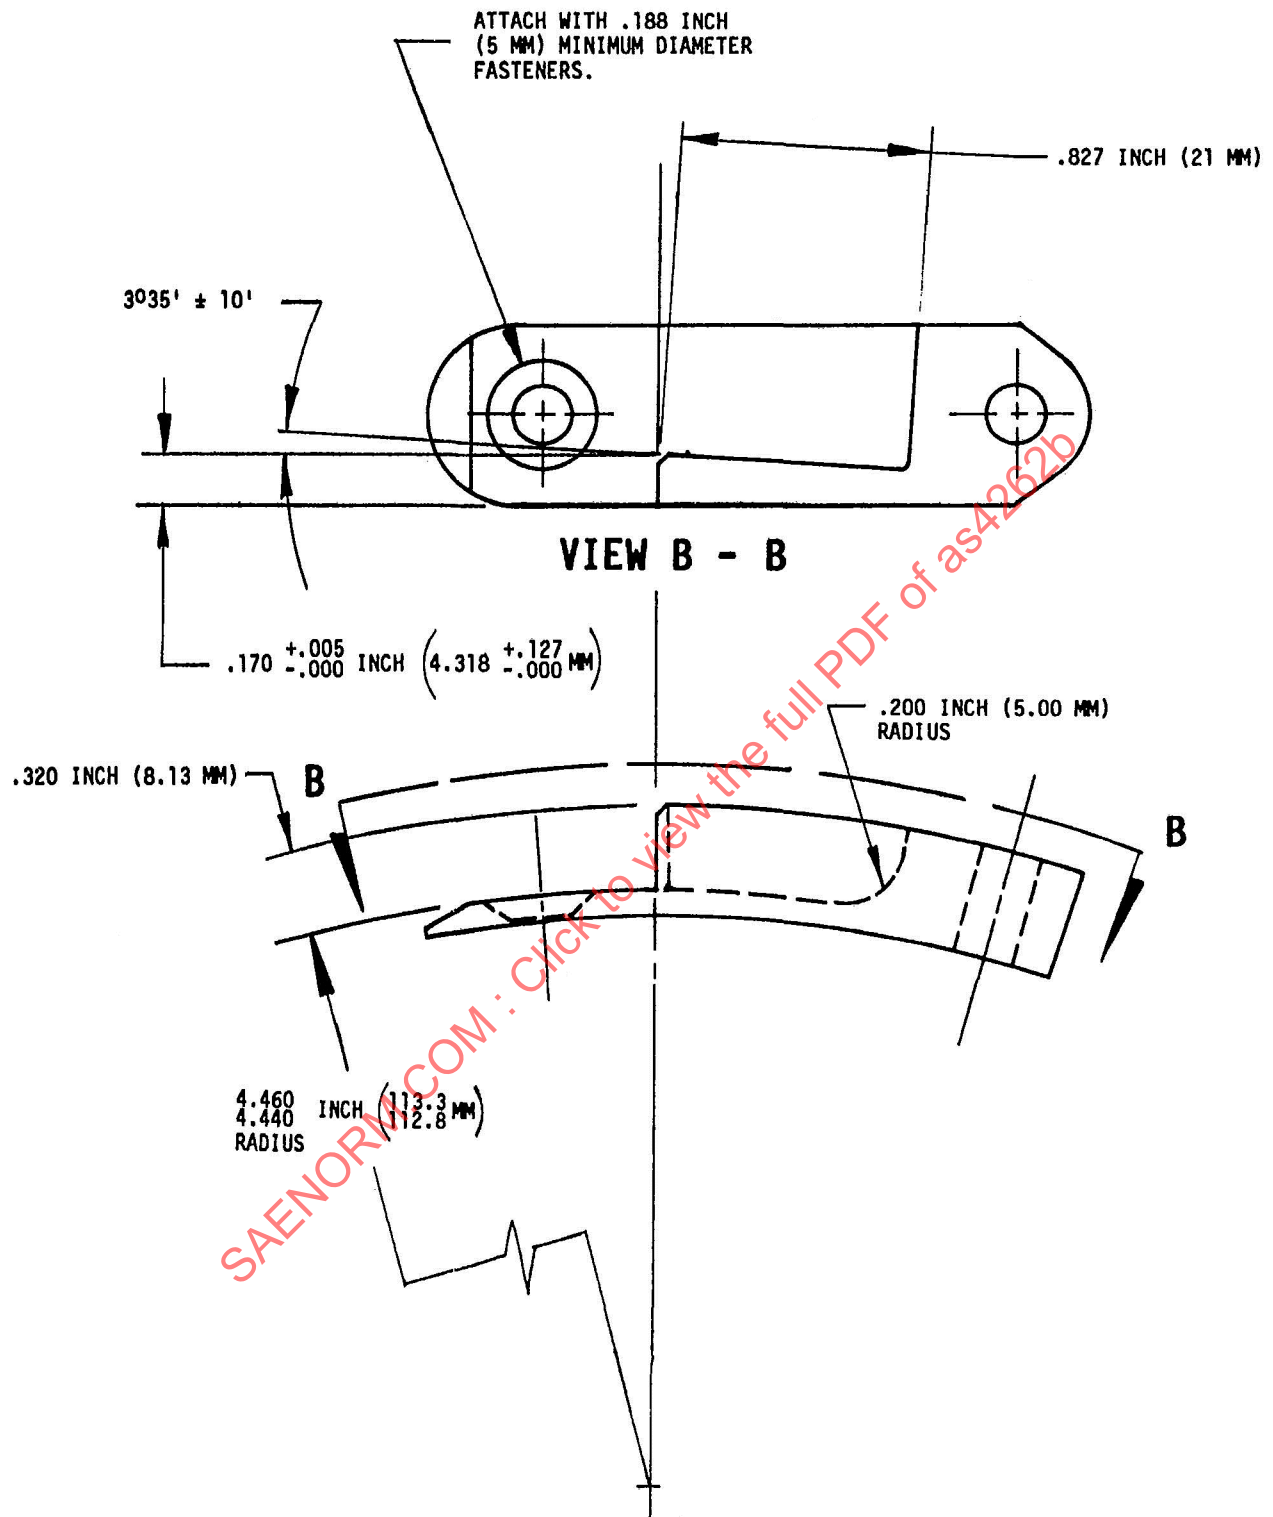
EXAMPLE OF TYPE B CONNECTION LOCKING LUG
